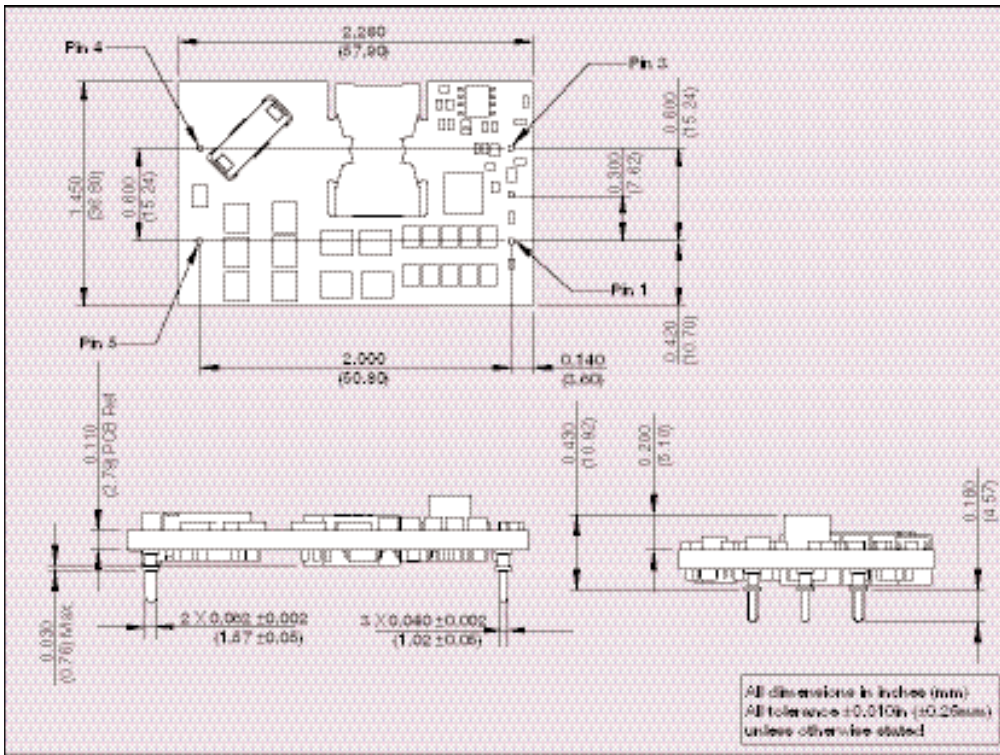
Horizontal Mechanical Drawing and Pinout Table
